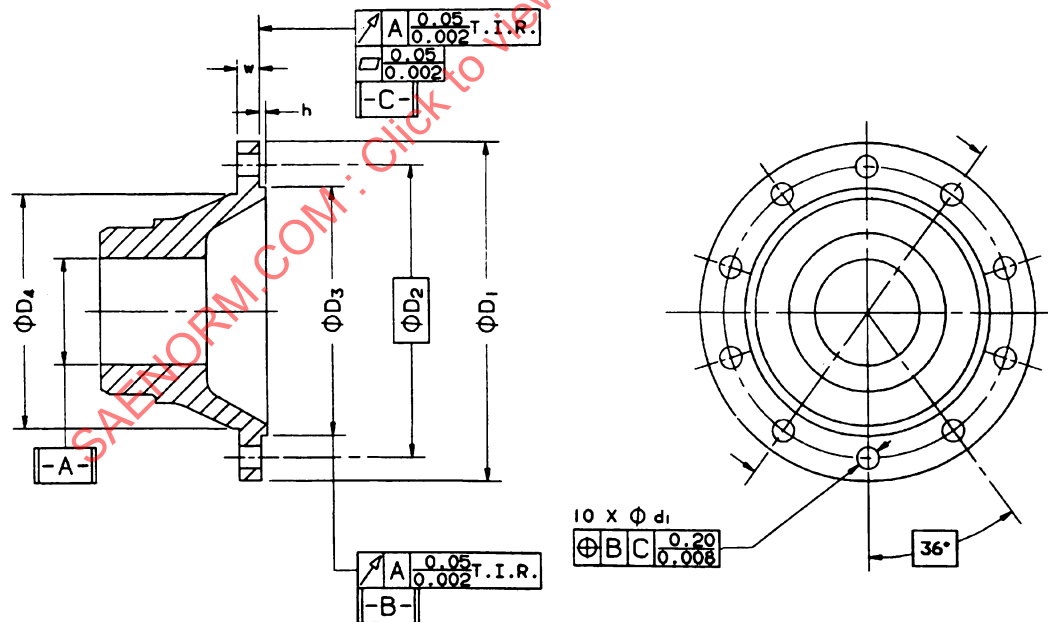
TYPE A COMPANION FLANGES—TRUE POSITION, FLATNESS AND RUNOUT TOLERANCES—mm/in
